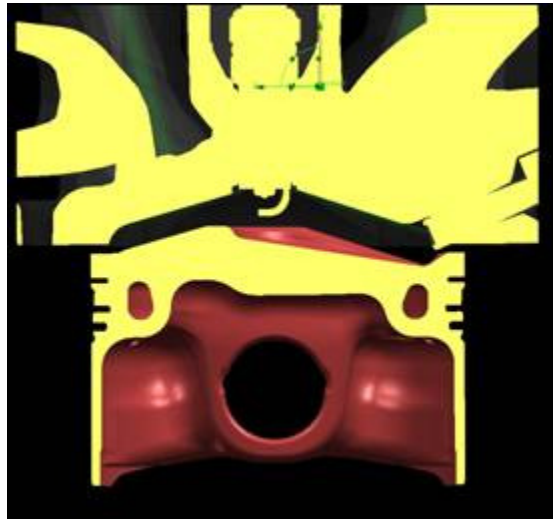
Cross section of combustion chamber at TDB with E85 piston
